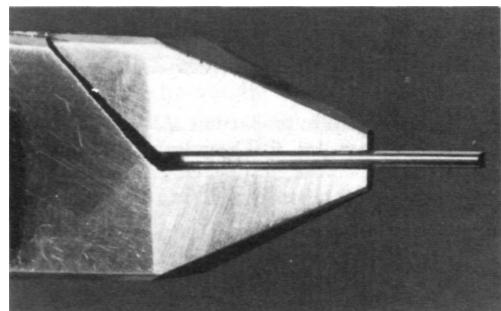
When a millimetre wire is grasped the inside surfaces of the beaks are parallel.
